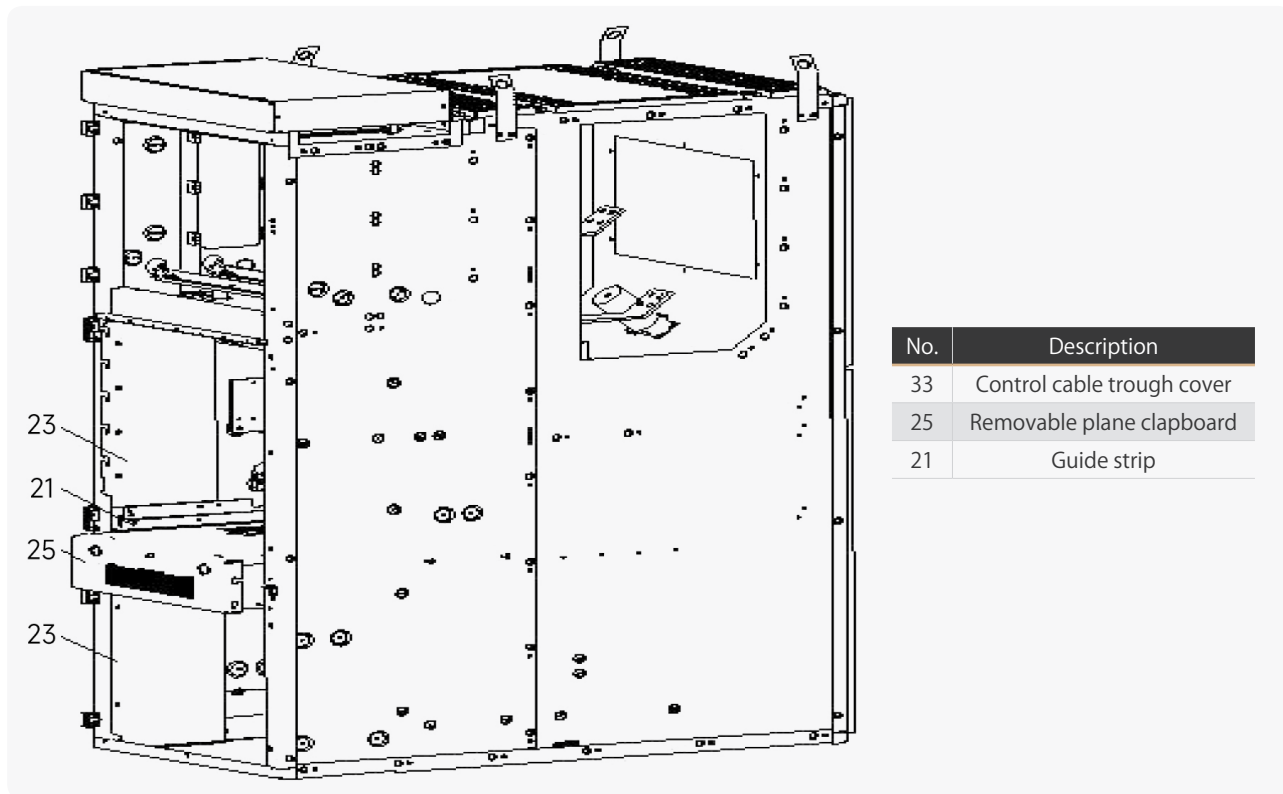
Seeing from the switchgear face, plane clapboard has been drawing out
